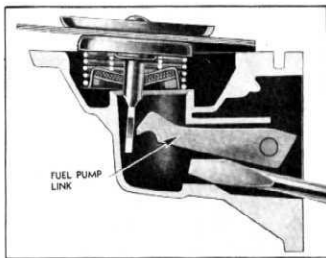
Method of Assembling Fuel Pump Diaphragm to Link
